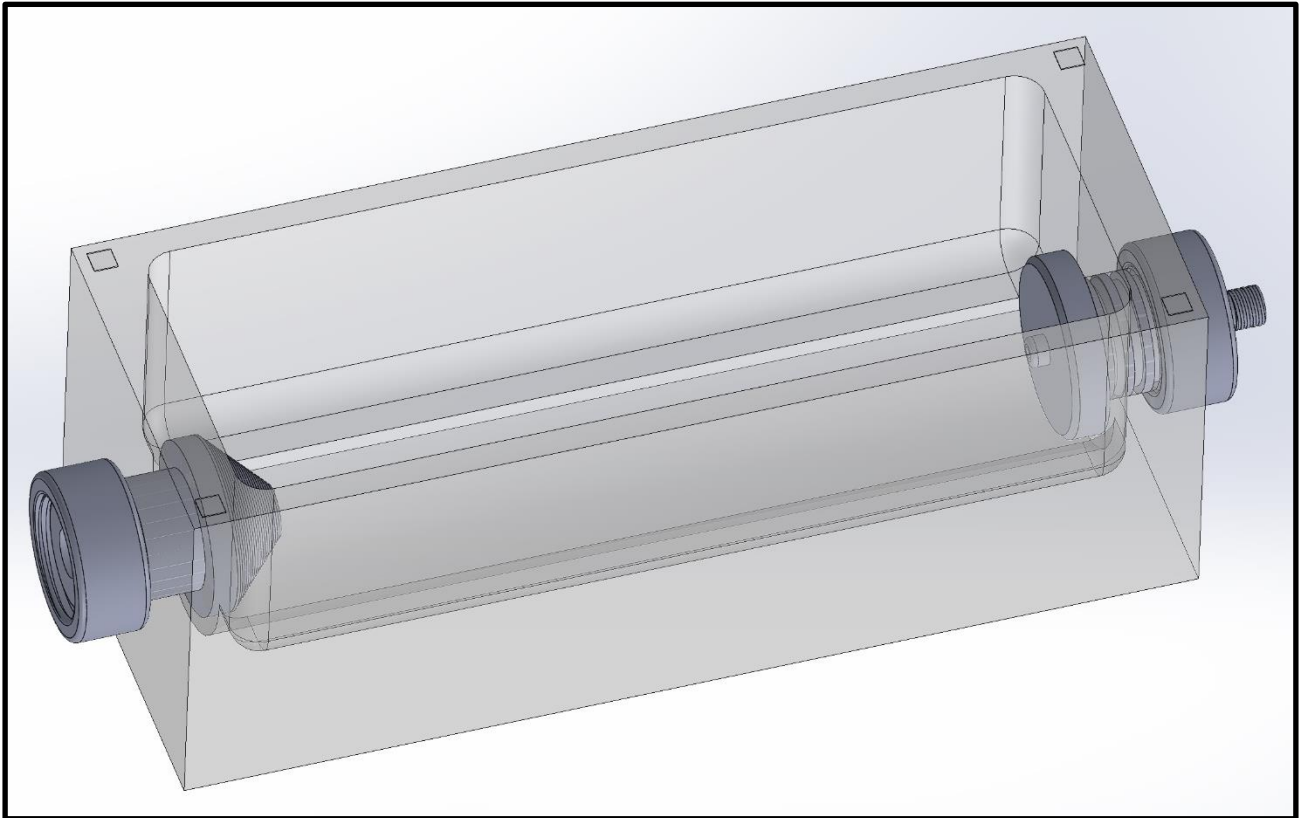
The chamber with the assembled inlets. Perfusion inlet (right), assembly inlet (left).
